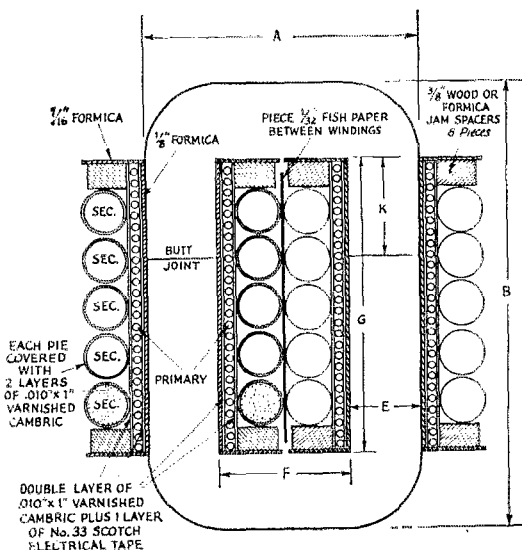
Cross section of the transformer assembly. Dimensions given are for the Arnold Engineering Company type AA-520 grain-oriented silicon steel core. If a core with other dimensions is used, the bobbin shown in Fig. 2 should be modified accordingly. Spacer thickness should be such as to hold the windings tightly in place to prevent vibration.
